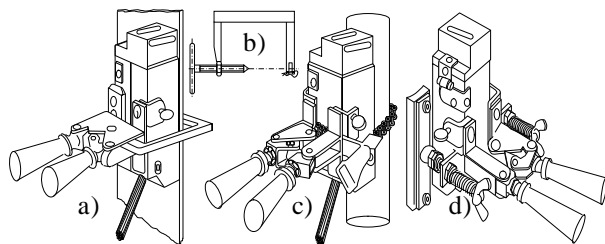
Ancillary tools for positioning the mould for welding of conductors^[1]:
